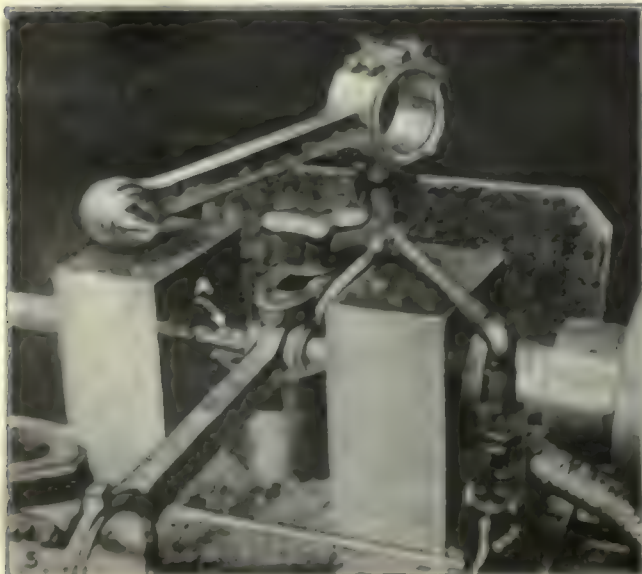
BORING SMALL END OF CONNECTING ROD. FIG. 6—SURFACING EDGES OF BEARINGS
